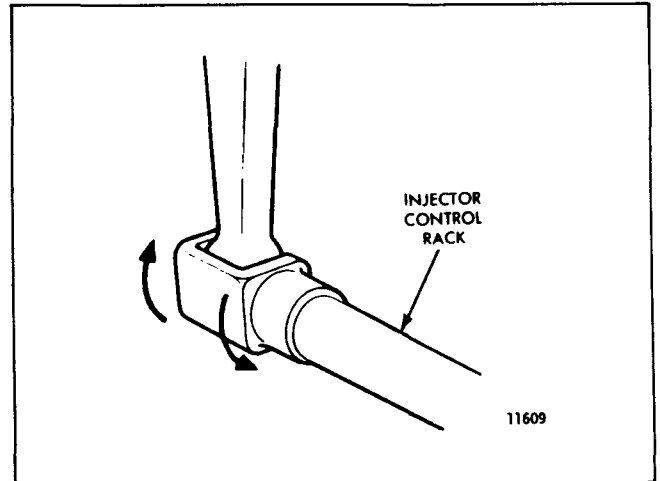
Checking Rotating Movement of Injector Control Rack
